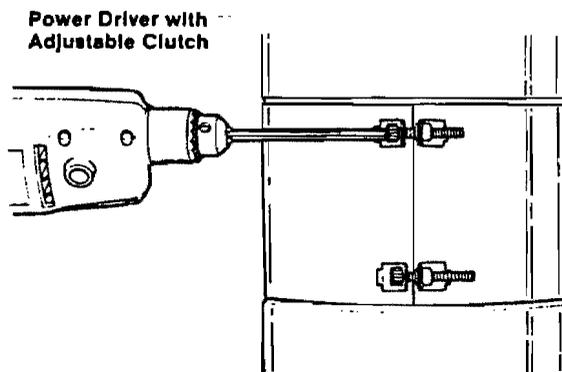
Basic Assembly Step 6: Tighten Closure Band fasteners using alternating pattern.
